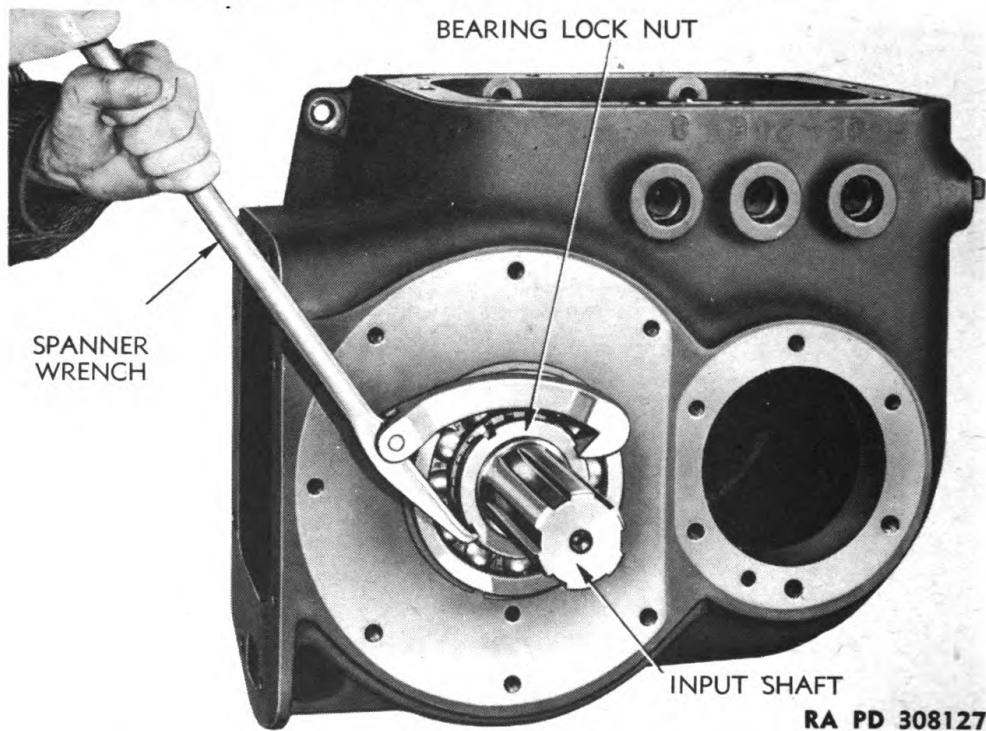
Removing Lock Nut From Input Shaft, Using Spanner Wrench (41-W-3250-10)
